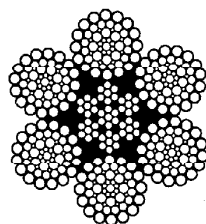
6 x 57 Seale Filler Wire Seale IWRC
